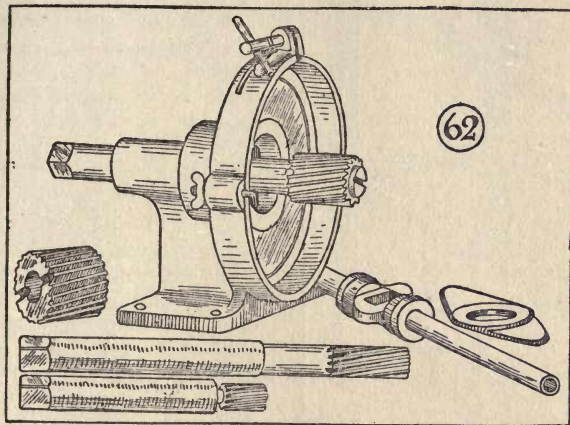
Another type of drum clamping device. This one has an extension to steady the reamer
